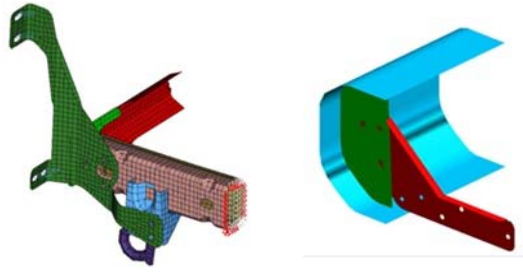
(a): Flat plate mount configurations along with their mounting points
